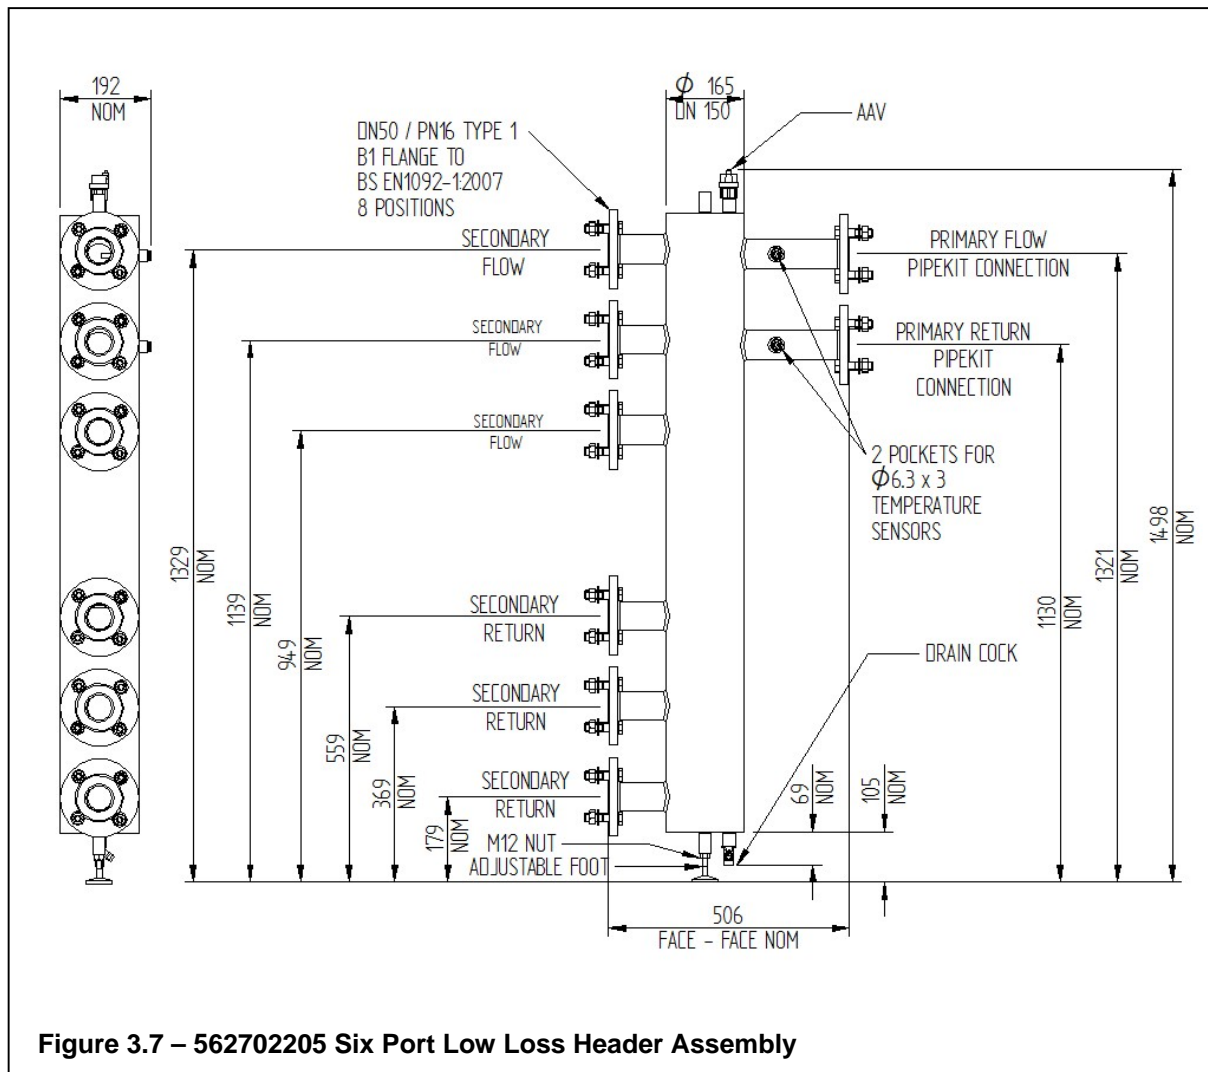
562702205 Six Port Low Loss Header Assembly
